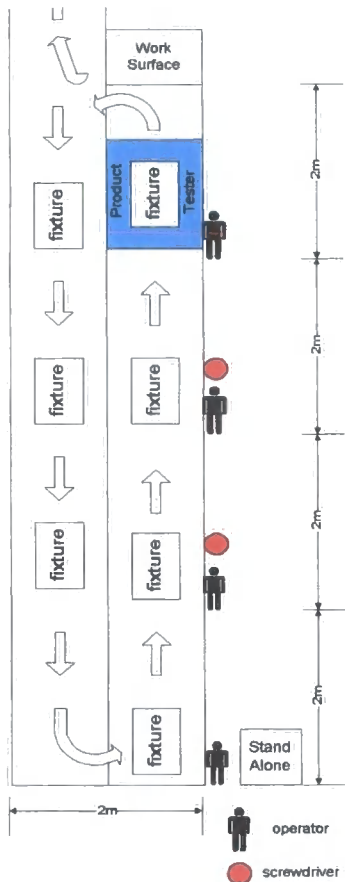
Assembly line layout for TwoShellMiniTrim_screws
